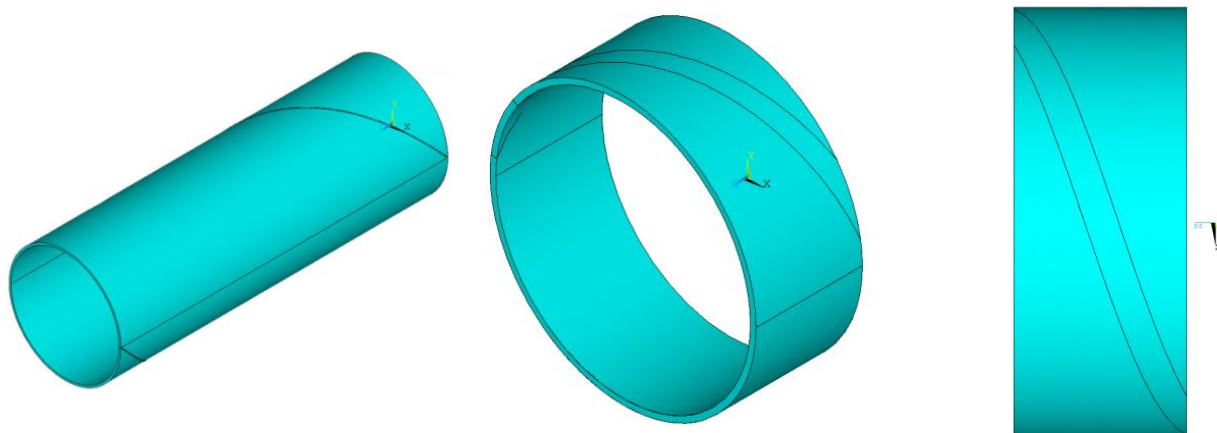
(a) 3D model of 75 mm spiral welded tube for one complete pitch, (b) Tube ring of 30 mm length, (c) Weld geometry in the ring
